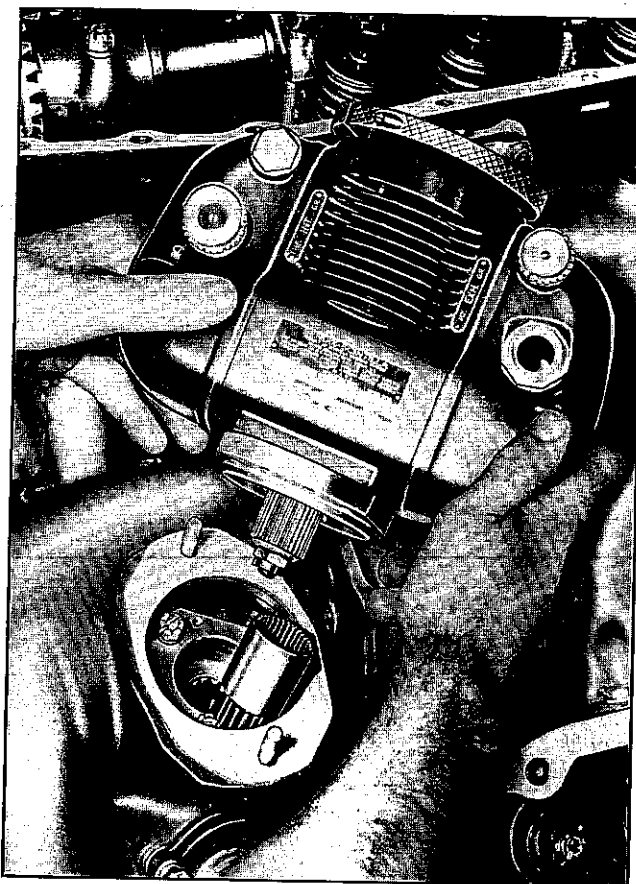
Installing Magneto Showing Magneto Drive Shaft Coupling and Clamping Tool.
